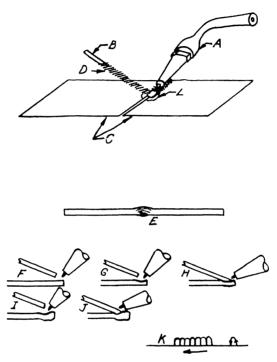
Welding sheet aluminum: A. Torch, B. Filler rod, C. Base metal. D. Flux, E. End view showing build up and penetration, F. Heating metal, G. Base metal melting, H. Dipping filler rod in puddle, I. Lifting filler rod and moving torch forward, J. Dipping filler rod in puddle, K. Filler rod motion, L. Flux spreading on metal
